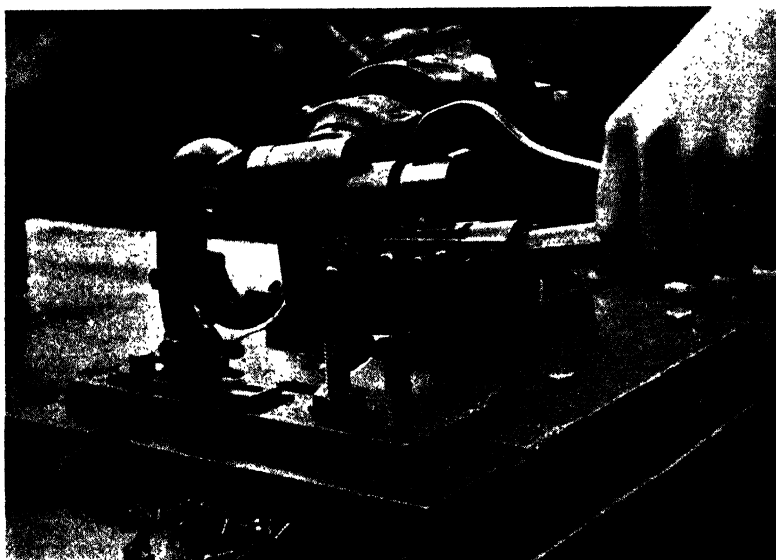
GUARD FOR SCREW-SLOTTING MACHINE
